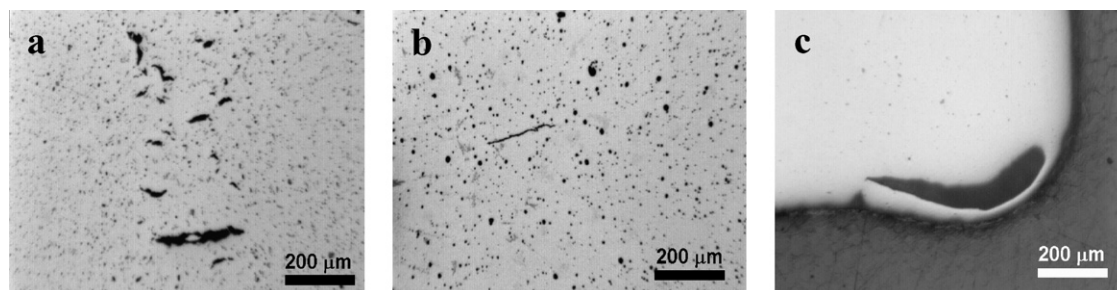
Characteristic defects originating from the injection molding processing step: (a) large voids; (b) cracks and (c) large pores due to entrapped air during molding step.
